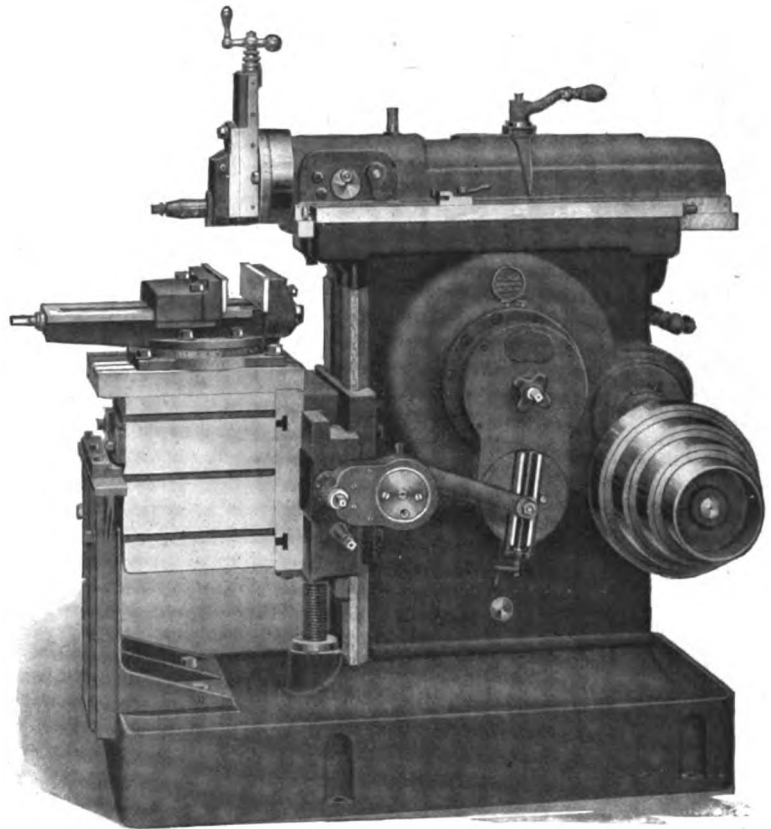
16-Inch Stockbridge Back Geared Shaper
